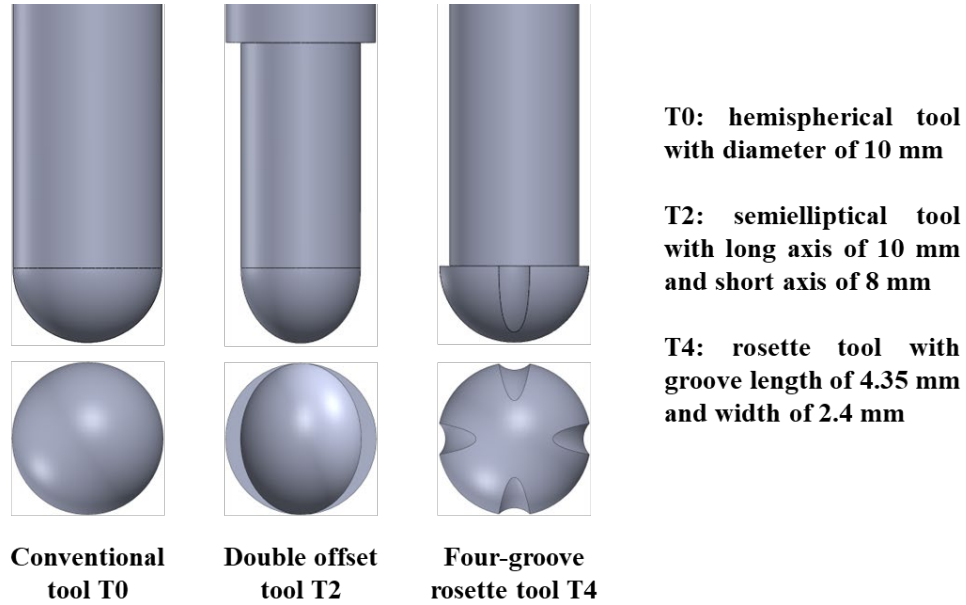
Tool design: conventional tool T0, double offset tool T2 and four-groove tool T4.
